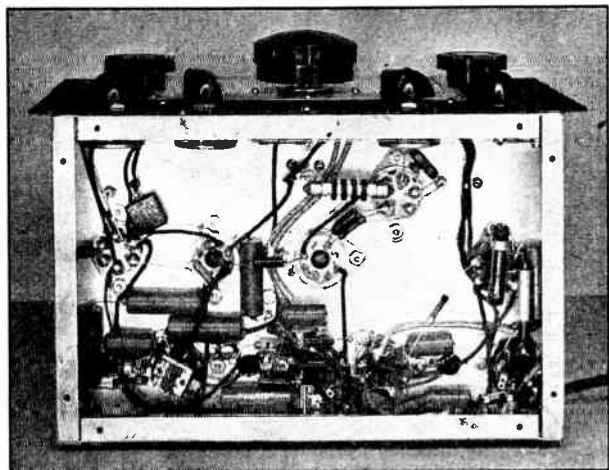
The below-chassis wiring and location of parts is shown in this bottom view of the seven-tube regenerative single-signal receiver.
